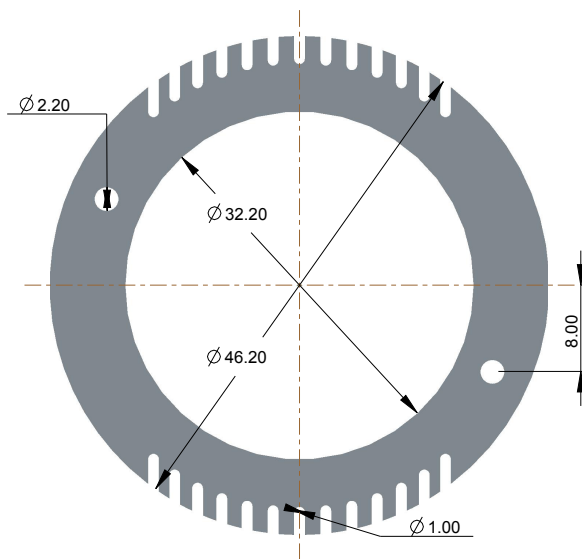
shows a CAD drawing of the MACOR ceramic disks used in the heat source and passive drag device. The wire used to construct the primary heater, passive drag device and secondary heat source was 80-20 Nickel Chrome Alloy. The wire had a thickness of 0.559 mm, an estimated flow facing length of 670 mm per disk, and theoretical emissivity of 0.87-0.89 (OMEGA Engineering Inc, 2017).
